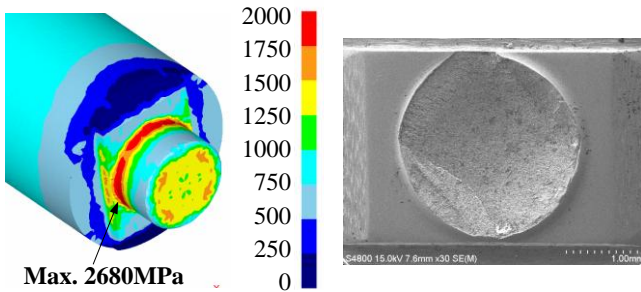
Effective stress distribution and fractured punch in the forging after redrawing process
